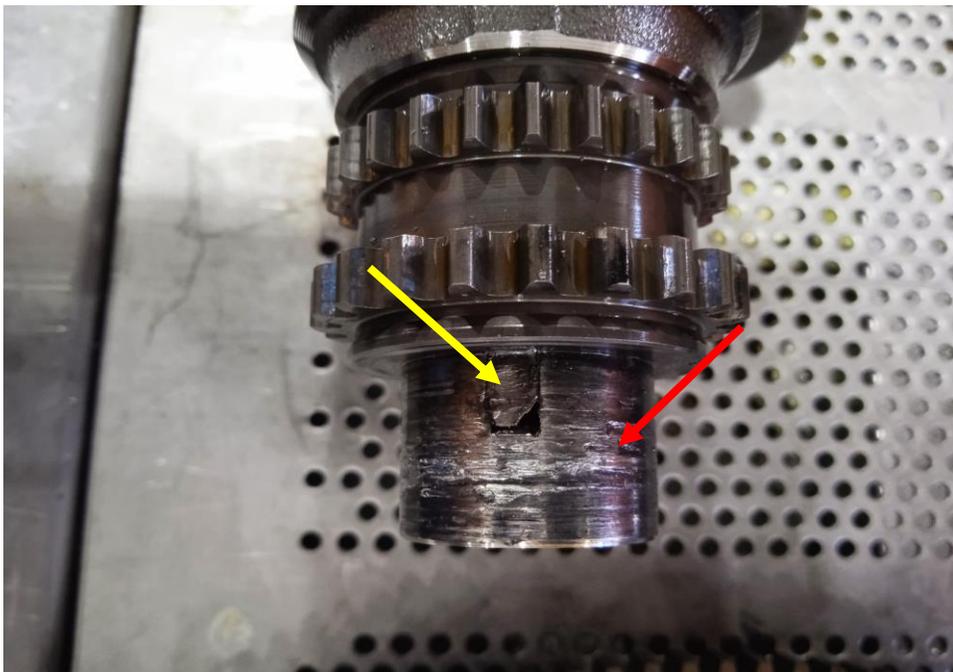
shows the close up view of the crankshaft pulley of the Insured Vehicle at the time of our inspection. The crankshaft pulley locking pin (red arrow) was observed to be broken and there was damages to the surface (yellow arrow) of the pulley as well at the time of inspection.
